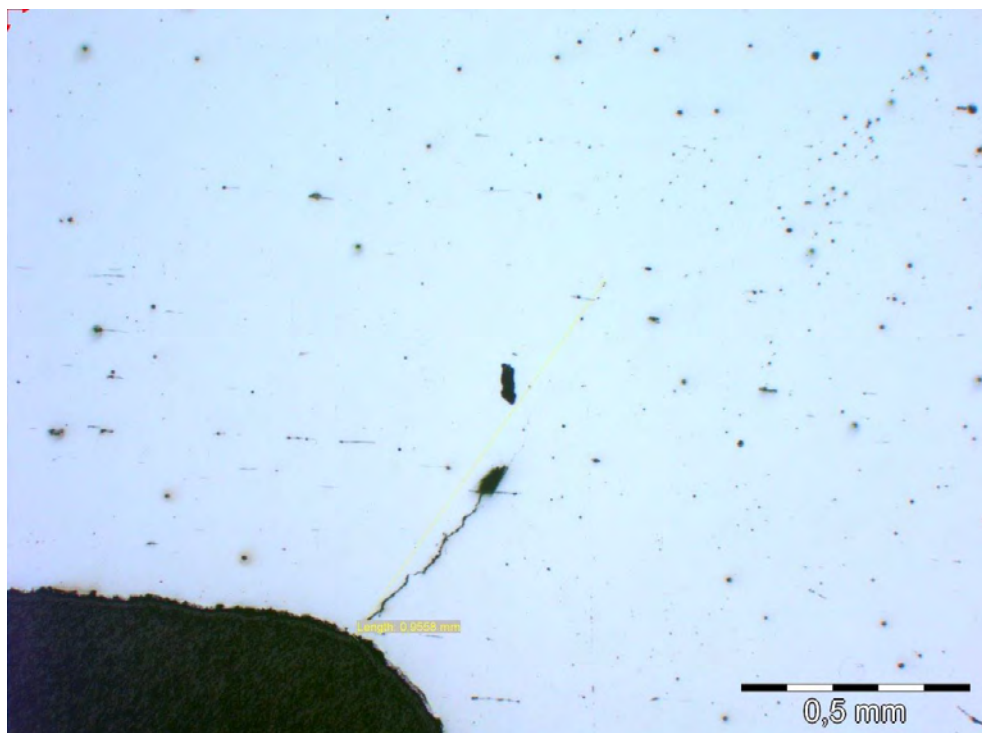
Cut three in crack at segment A, first ridge on barrel no. 14389
